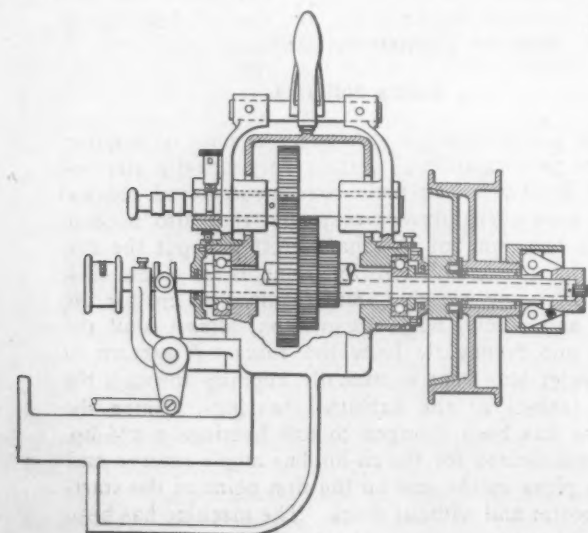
Ball Bearing Milling Machine Speed Box Used by the Becker Milling Machine Company, Hyde Park, Mass.
